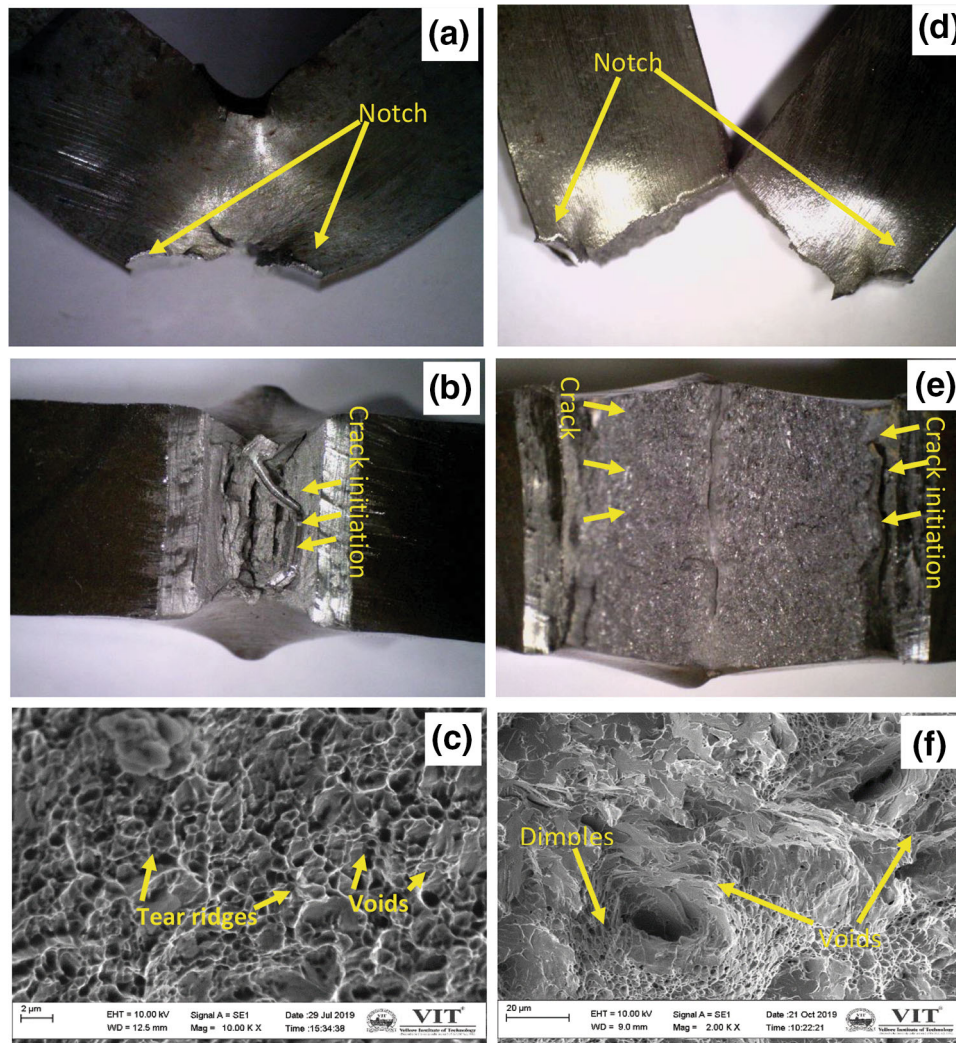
Fracture impact tested HLAW-1 sample (a-c) at room temperature (d-f) at  $-60^{\circ}\text{C}$  (a, c) Side view (b, e) Top view (c) Fractography at 10 KX (f) Fractography at 2.5KX.
